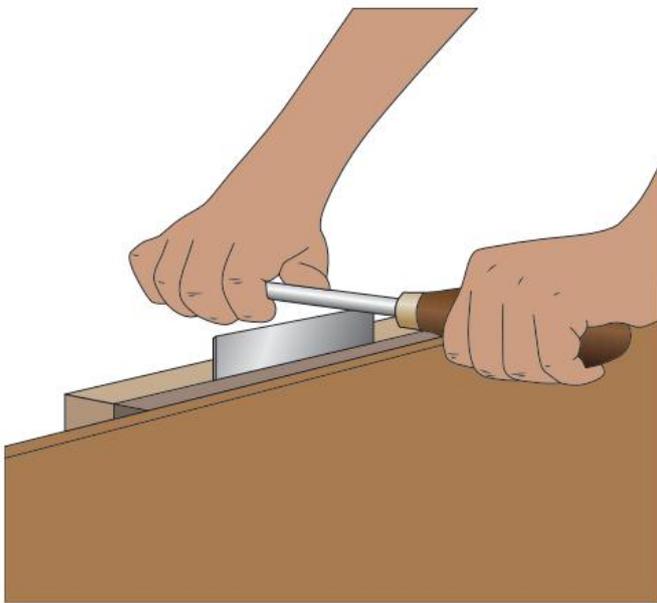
Using a burnishing tool to create a burr on the edge of a scraper
